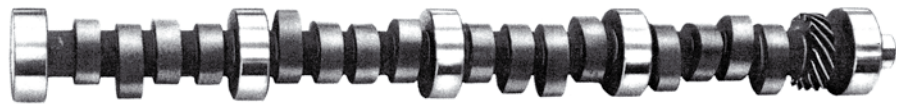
The camshaft is the same as the 1966 Le Mans one, except it's a new casting to insure uniform lobe hardness and machining.
